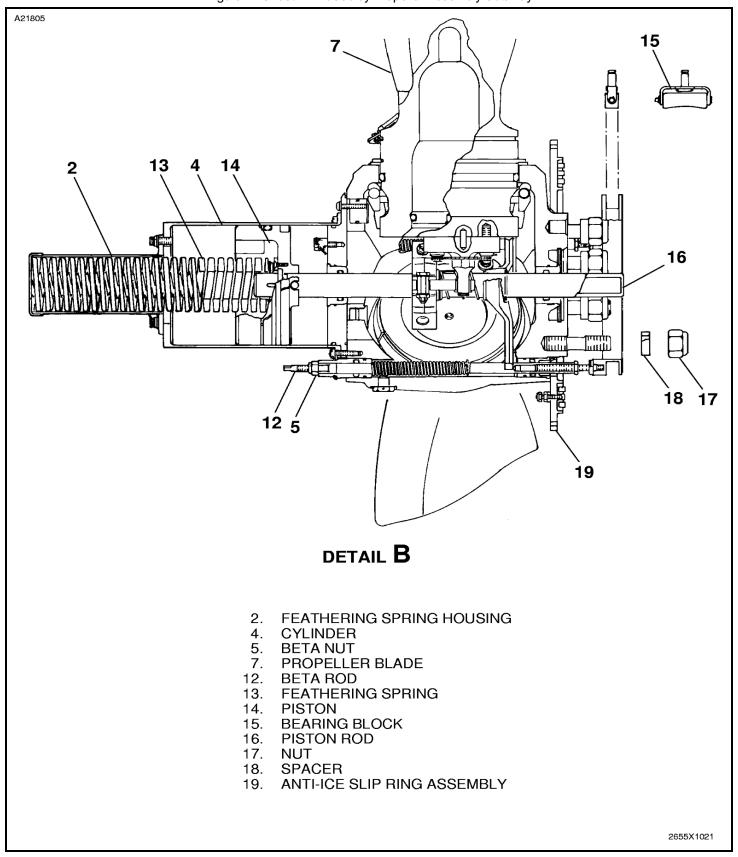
Sheet 2: McCauley Propeller Assembly Cutaway
